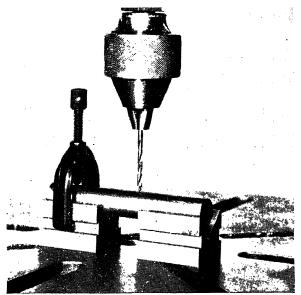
C.—Drilling a cylinder. Using V blocks as a fixture to ensure lining up the cylinder (see Fig. 324B). (Brown and Sharpe.)
